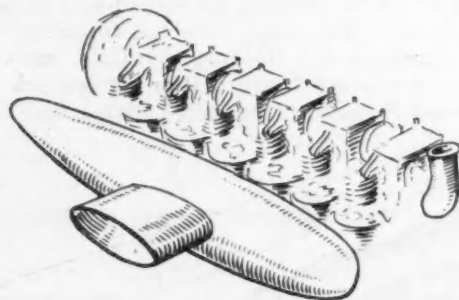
EXHAUST MANIFOLD USED ON RECENT MERCEDES ENGINES
